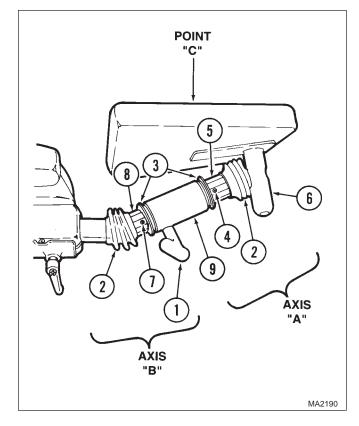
Articulating Headrest Assembly Adjustment
